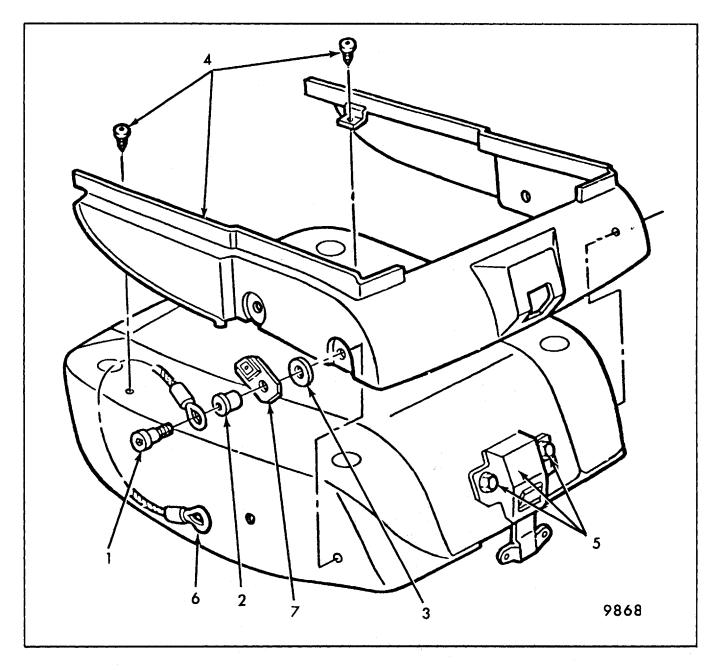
Bucket Seat Bottom Finishing Panel
